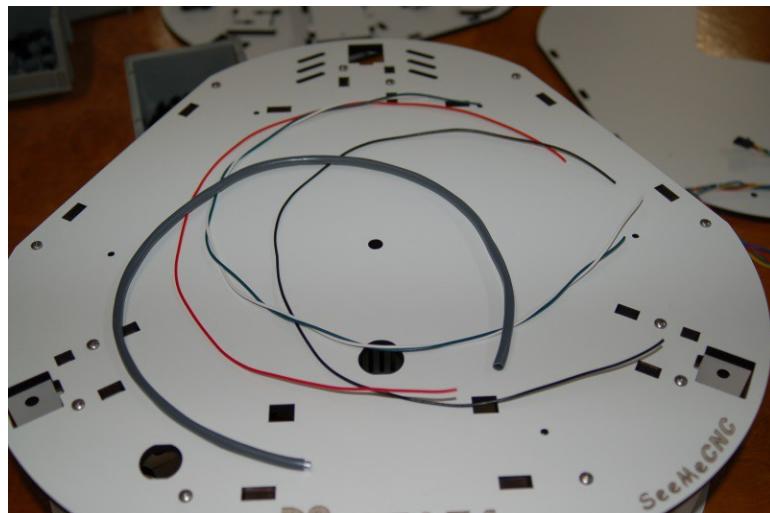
B-17: Wire stripped out of the 4 conductor cable.
